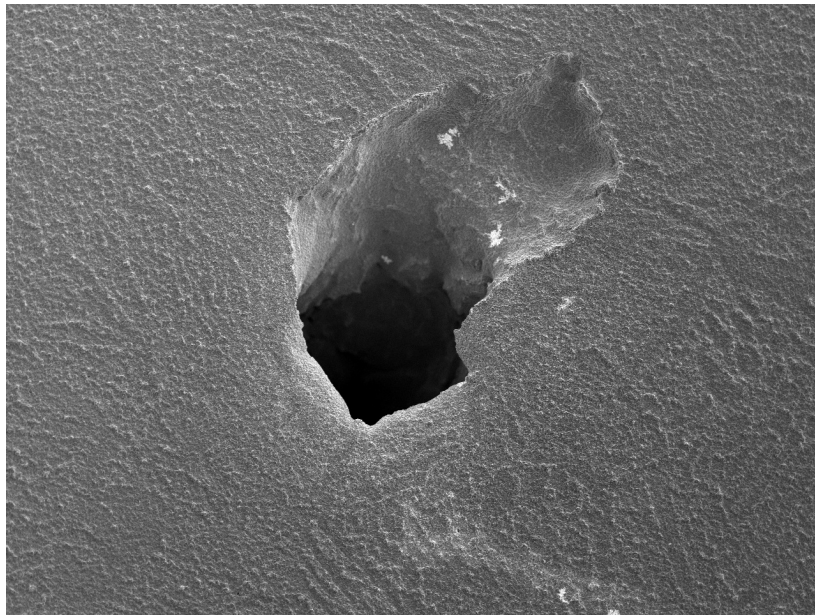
Photograph of the large, through-pore exposed on the surface of an untreated CD3MN specimen after 1 h sonication in mercury. The actual diameter of the pore (horizontal direction in the photo) is about 0.5 mm.
